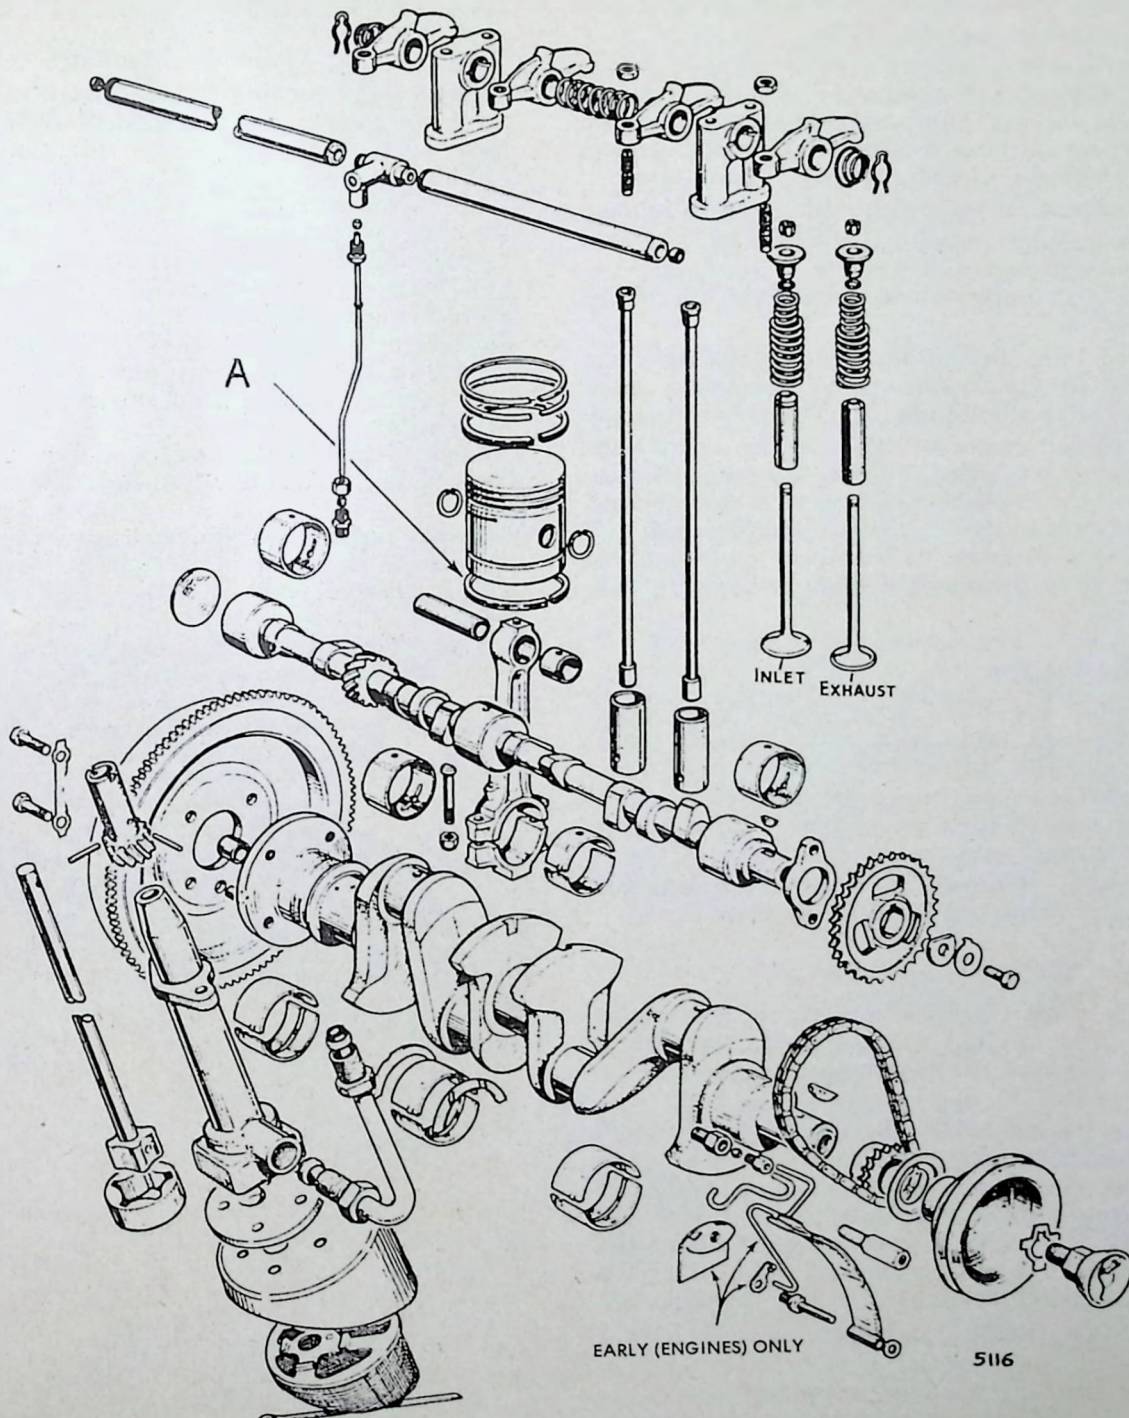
Exploded view of the O.H.V. engine working parts. A—Bottom ring fitted as standard.
